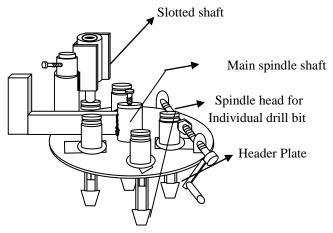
Layout of Multi-spindle IV. DESIGN PROCEDURE
